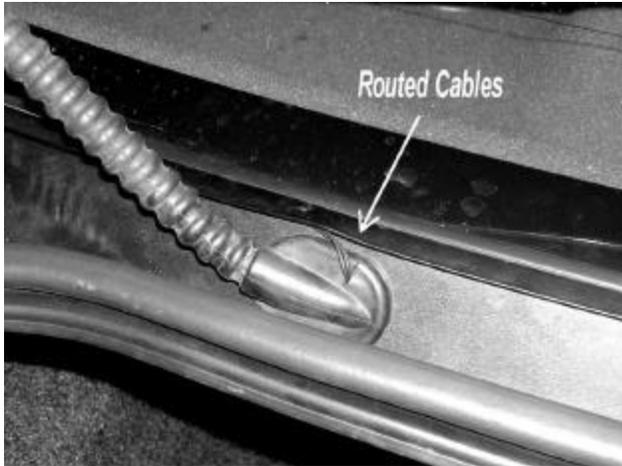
Cables routed directly through the molding and through the cable channel to the interior
